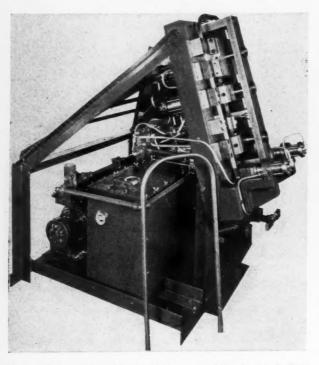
This machine pierces and forms six holes in metal chair frames and also forms the floor ends.
